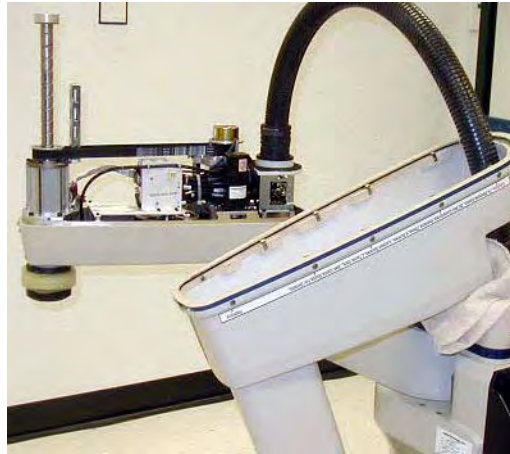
IP 65 Robot with Outer Link Cover Removed
